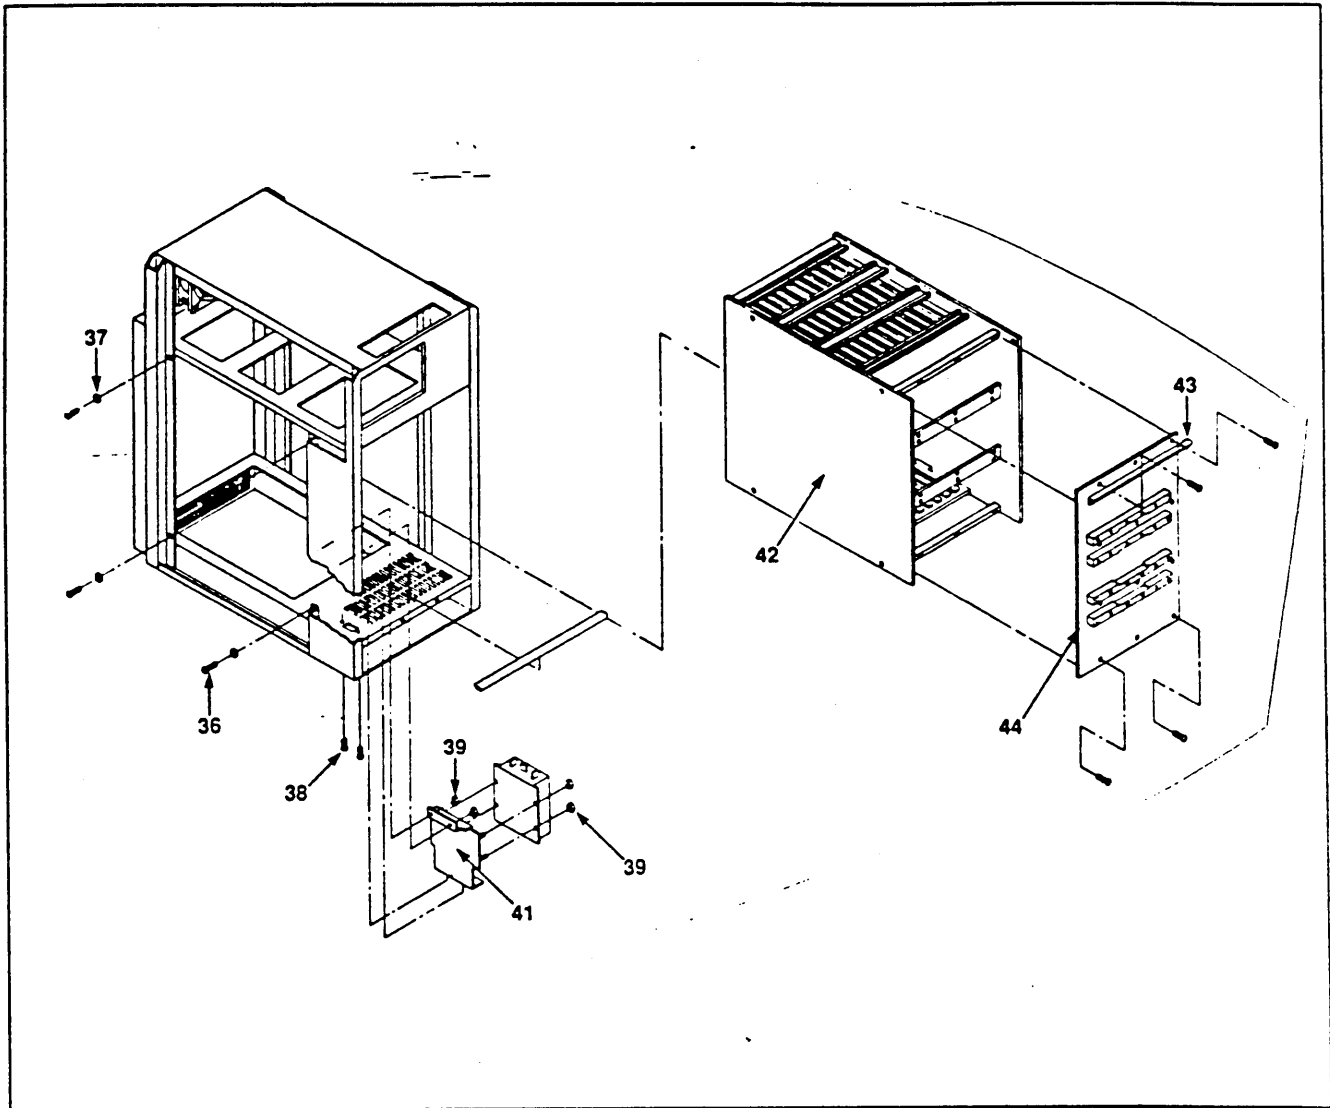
Illustrated Parts Breakdown #5: ETA Power Supply Mounting
